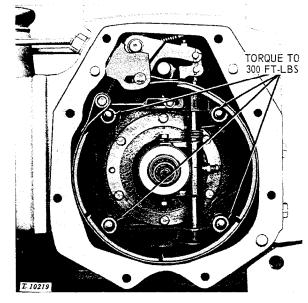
Torquing Steering Clutch Hex. Nuts
